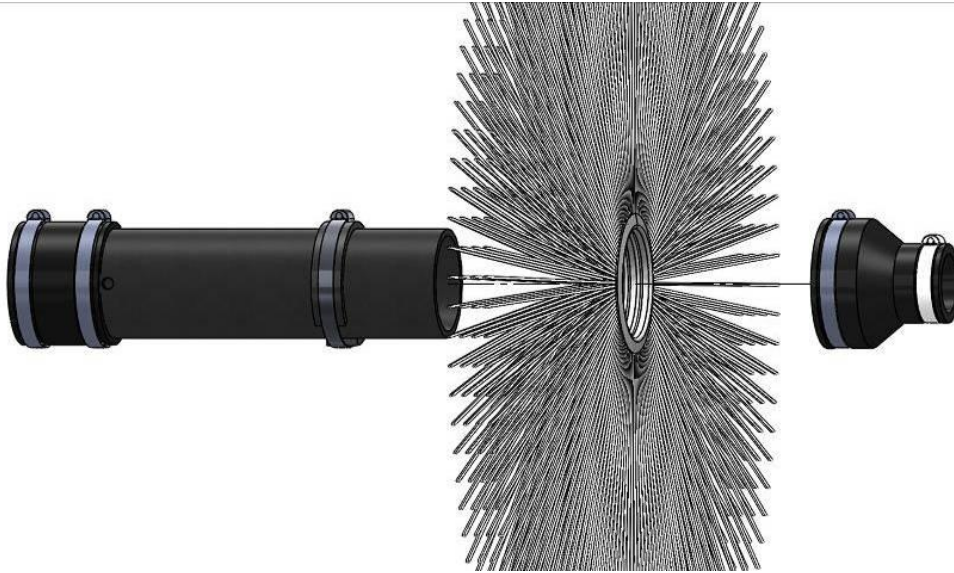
Exploded view of tail section, brushes and rubber coupler.
